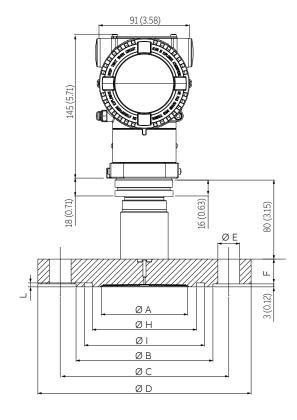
266HRH/266NRH with barrel housing and direct mount seal S26FE fixed flange Raised Face EN 1092/1 Form D
